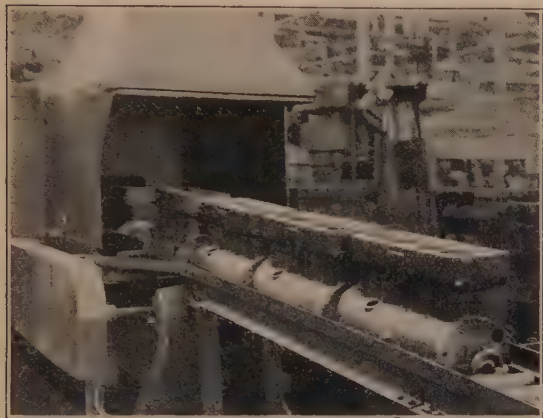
Cylinder blocks coming from washer to assembly line — Model A Ford
